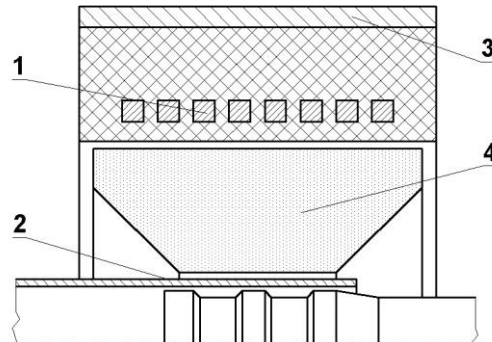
Compressive electromagnetic forming tool with field shaper (1-coil, 2-workpiece to be formed, 3-metal casing, 4-field shaper)
